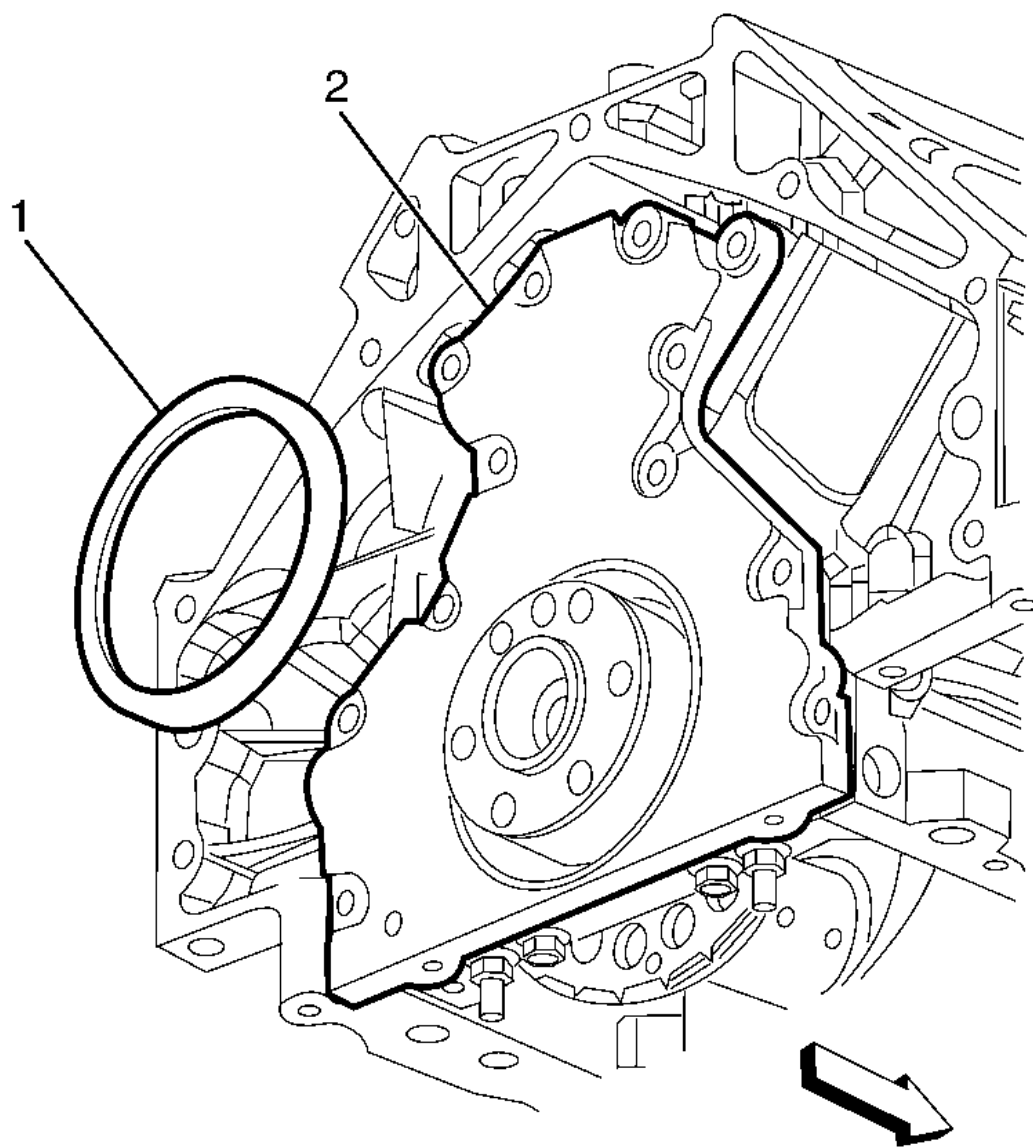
Identifying Crankshaft Rear Cover & Oil Seal
